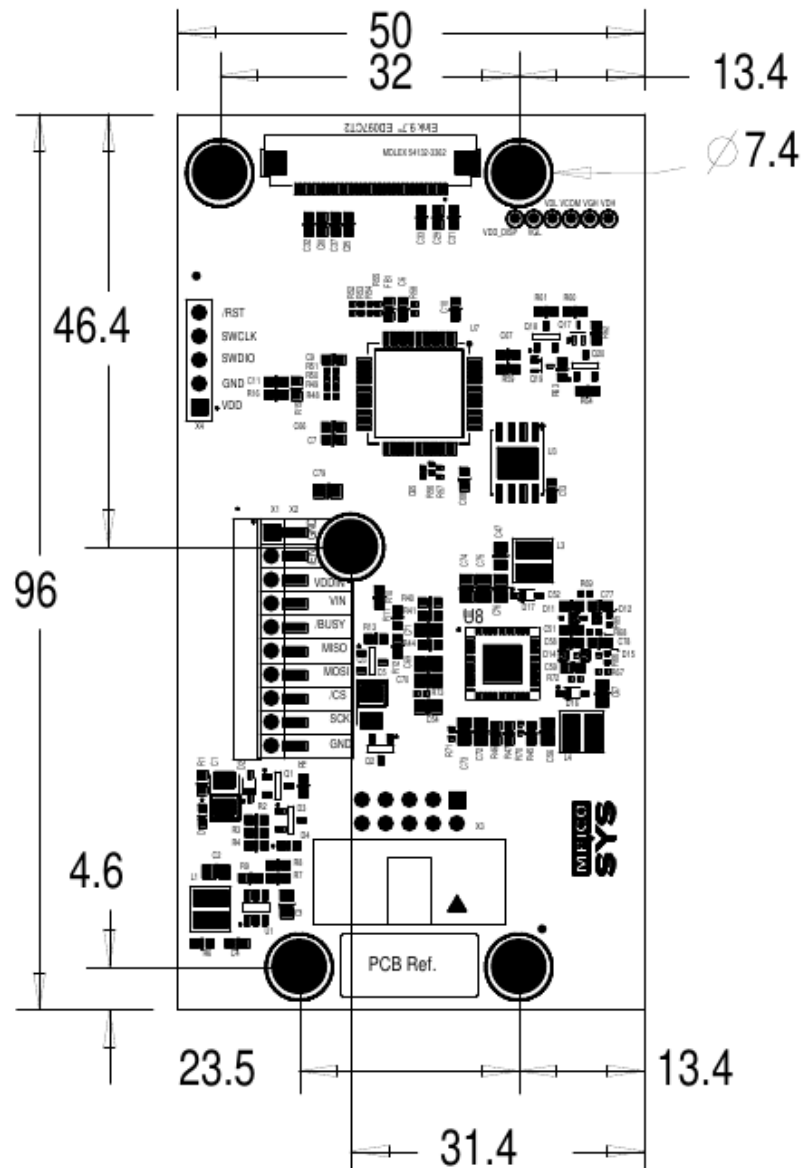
TCM2-E97-320 Outline (all dimensions in mm)
